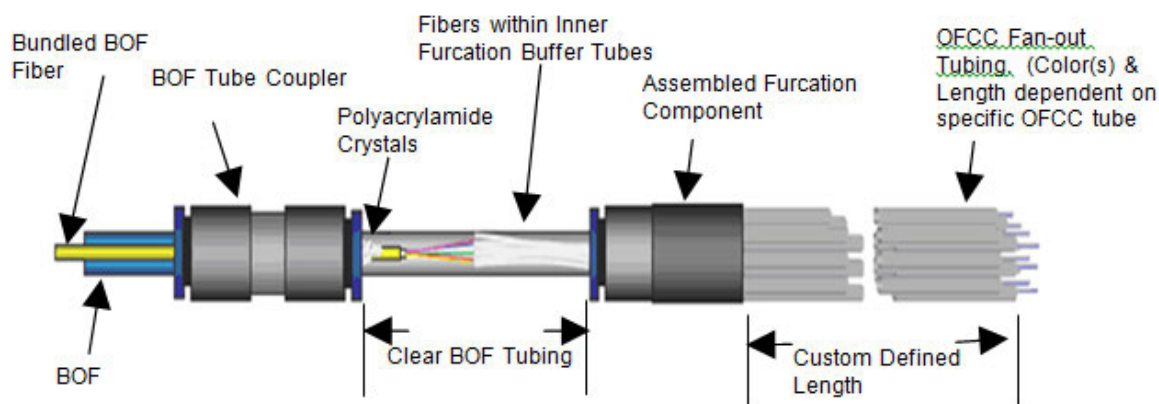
F2-8. Furcation assembly after attachment of loose tube furcation cables.
